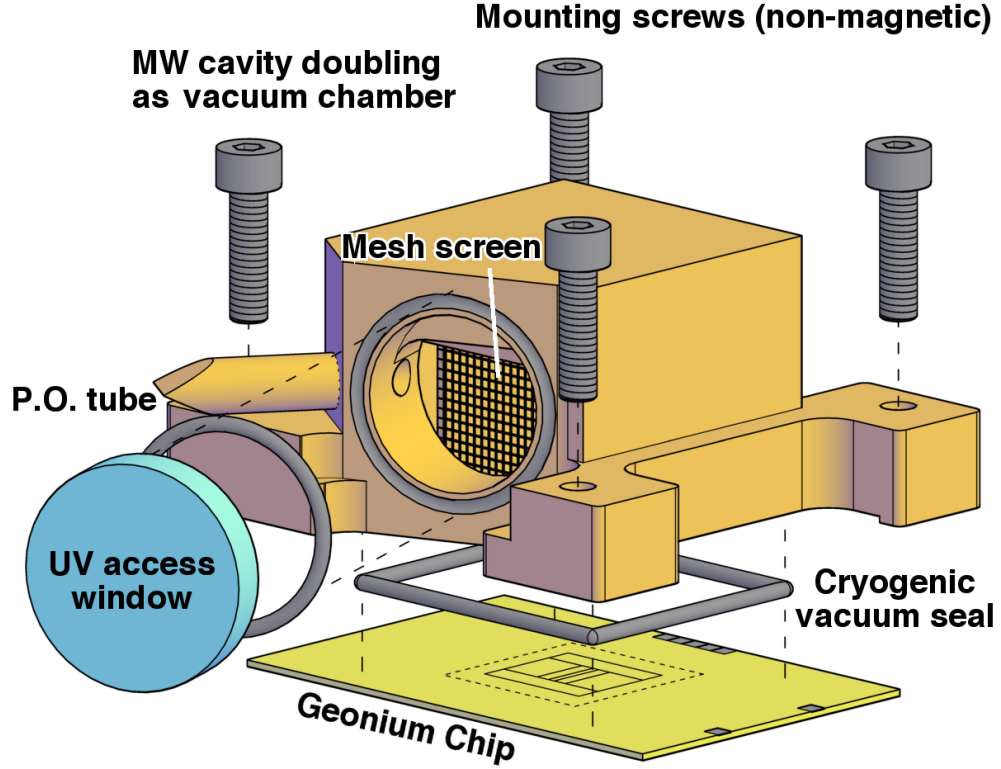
Shown here is an exploded model of the chamber. The indium vacuum seal can be seen between the chip and the chamber, to form the inner cryogenic vacuum.
